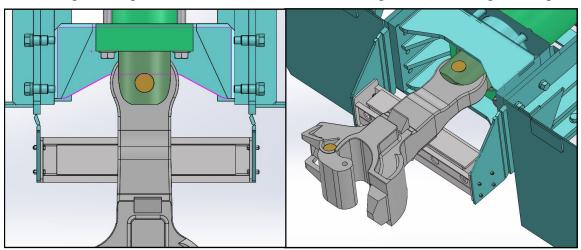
Modified plates that form the sides of the draft pocket, where they extend forward of the end plate
